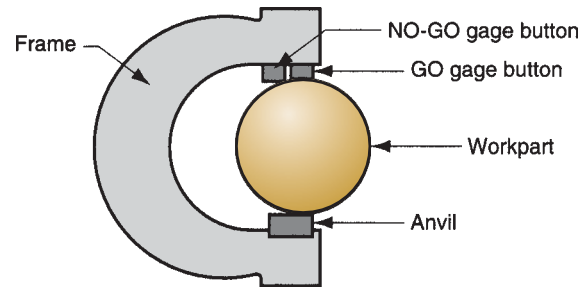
It has two gage buttons, the first being the GO gage, and the second being the NO-GO gage. Snap gages are used for checking outside dimensions such as diameter, width, thickness, and similar surfaces.
